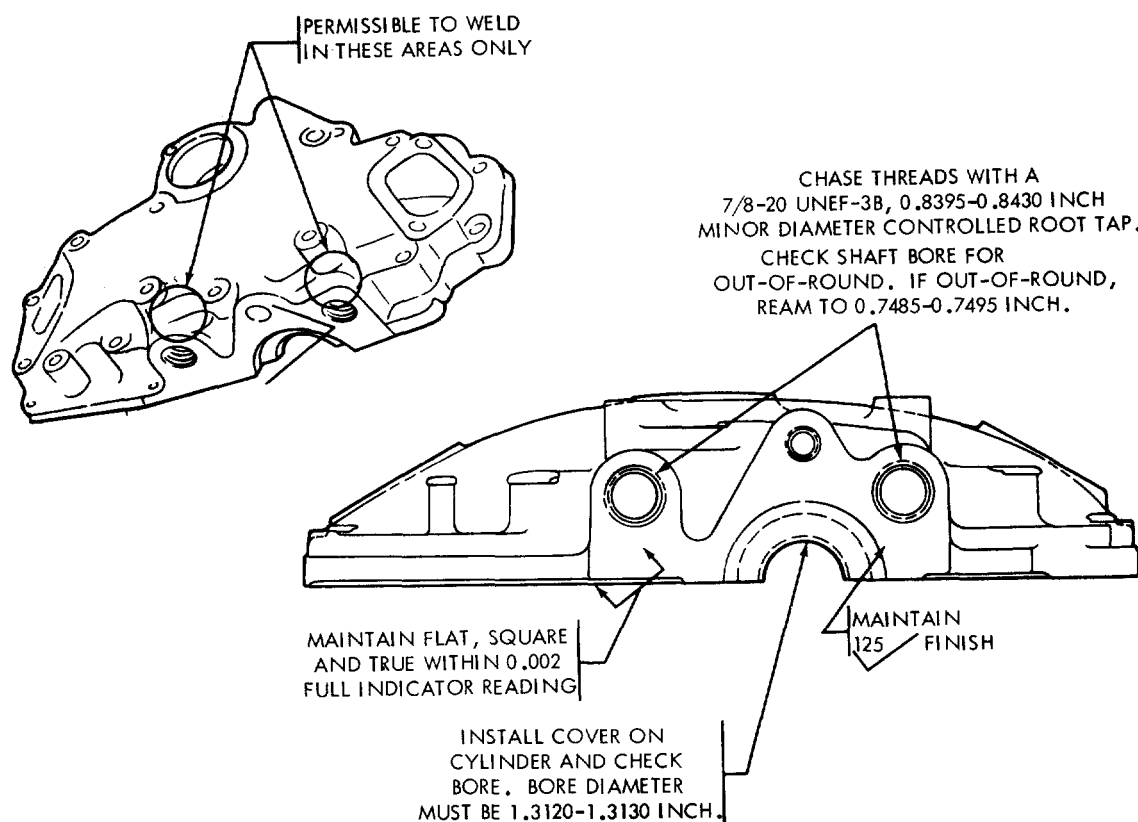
Valve rocker arm cover welding standards.
